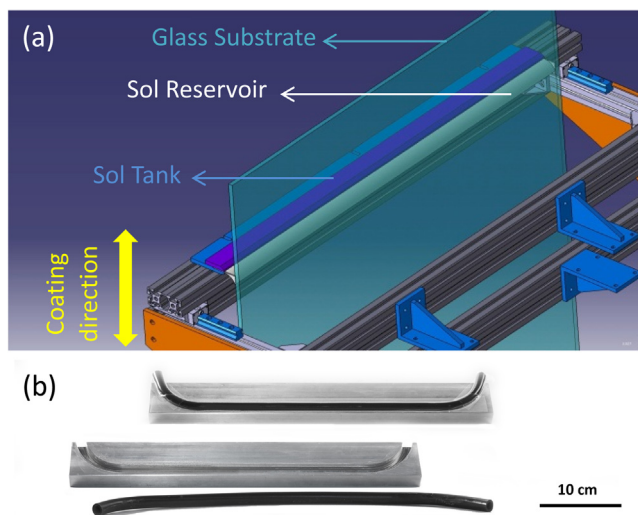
(a) Schematic diagram of the coating device, (b) Construction of the sol tank with mounted rubber as the sol reservoir.
